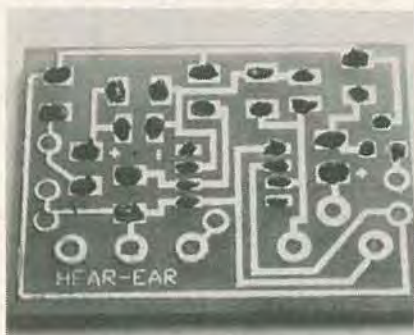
DROPS OF SOLDERING PASTE are applied only to the components' soldering pads.
